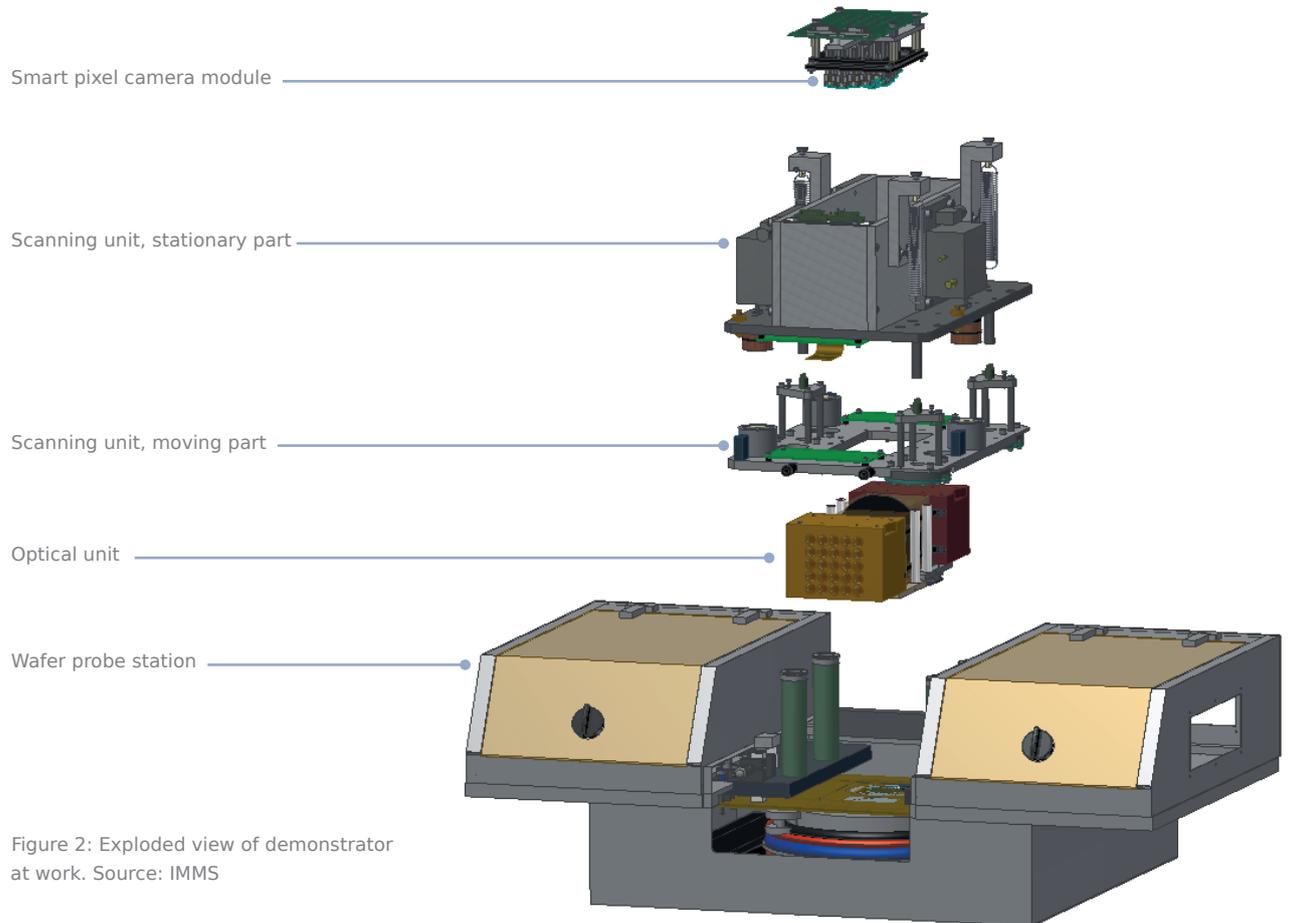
Exploded view of demonstrator at work. Source: IMMS
